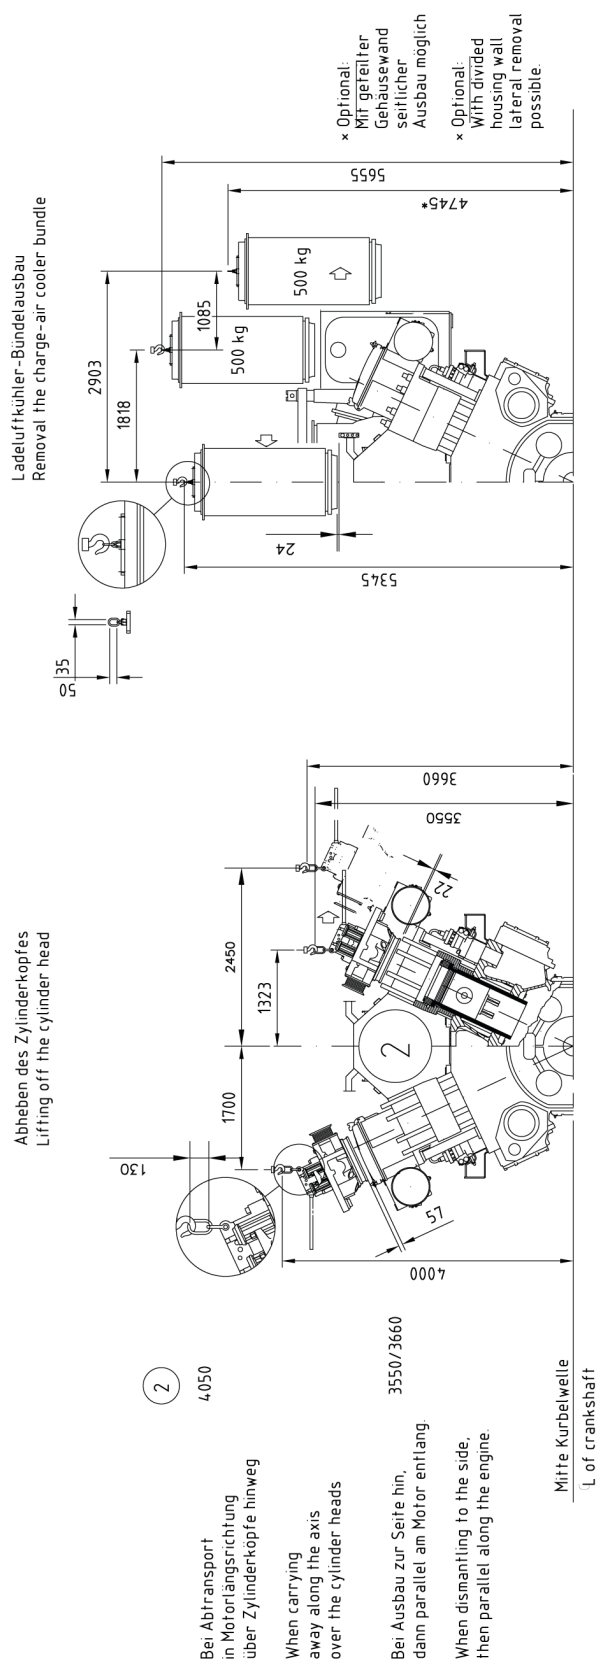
Removal of cylinder head and charge air cooler bundle – V engine
